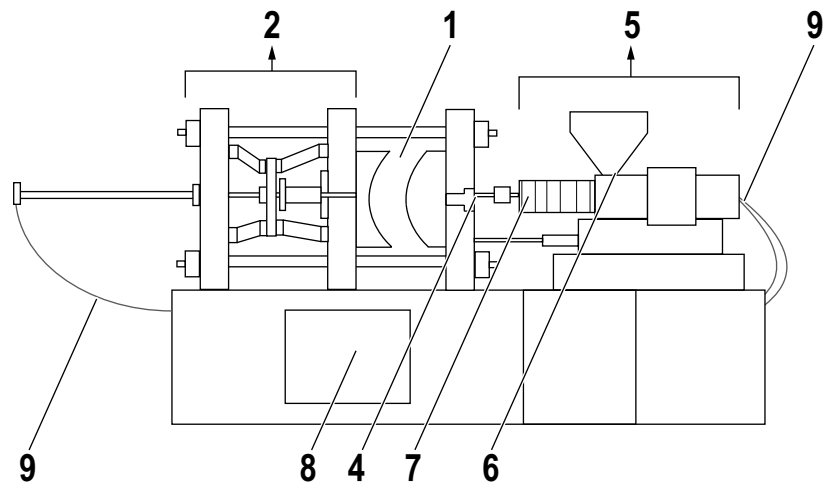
Injection molding machine hazard areas (Front view with guards removed)
